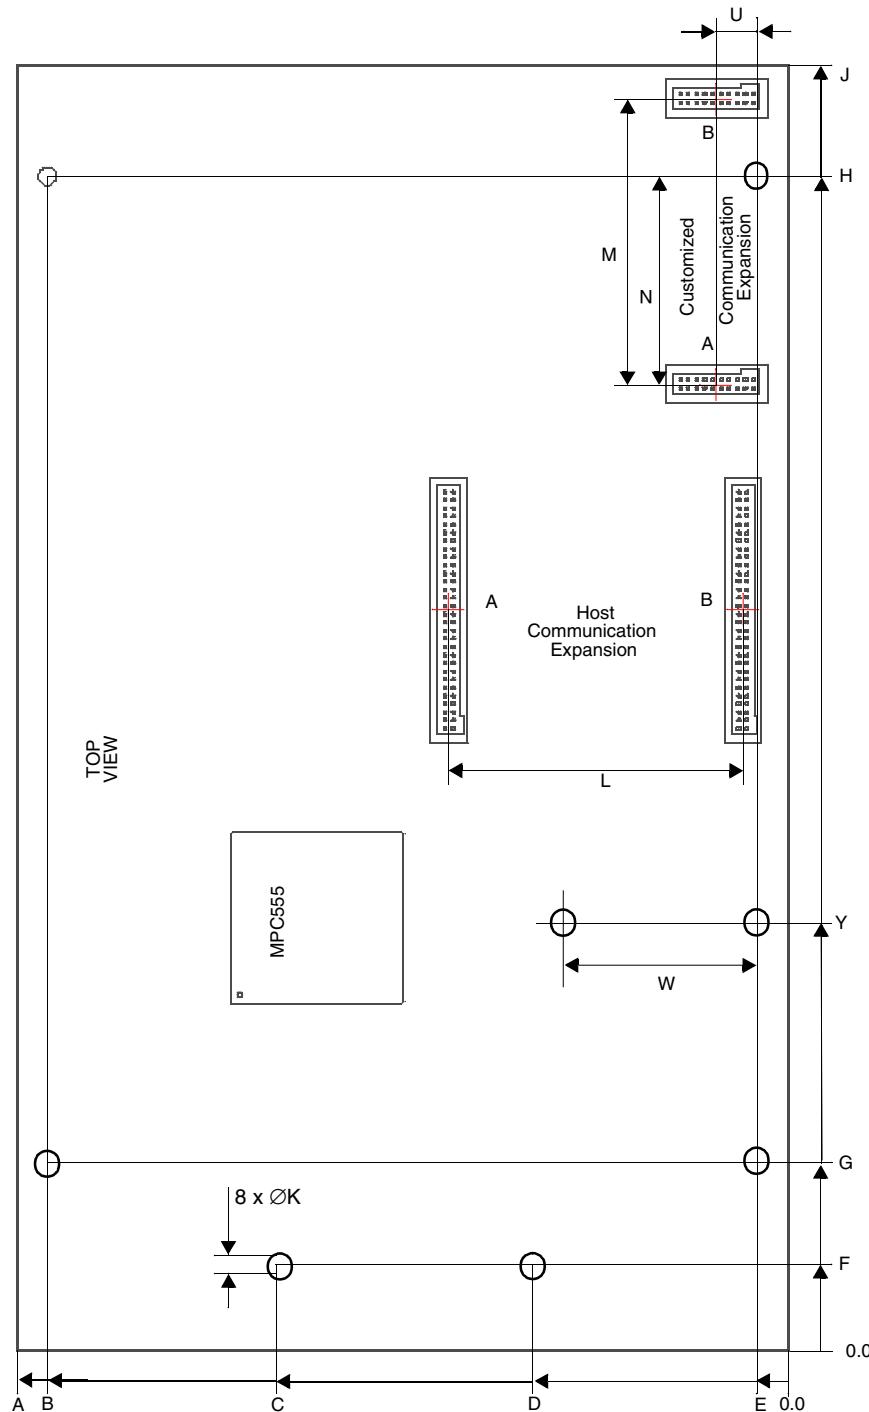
Mounting Holes and Top-Side Connector Dimensions
